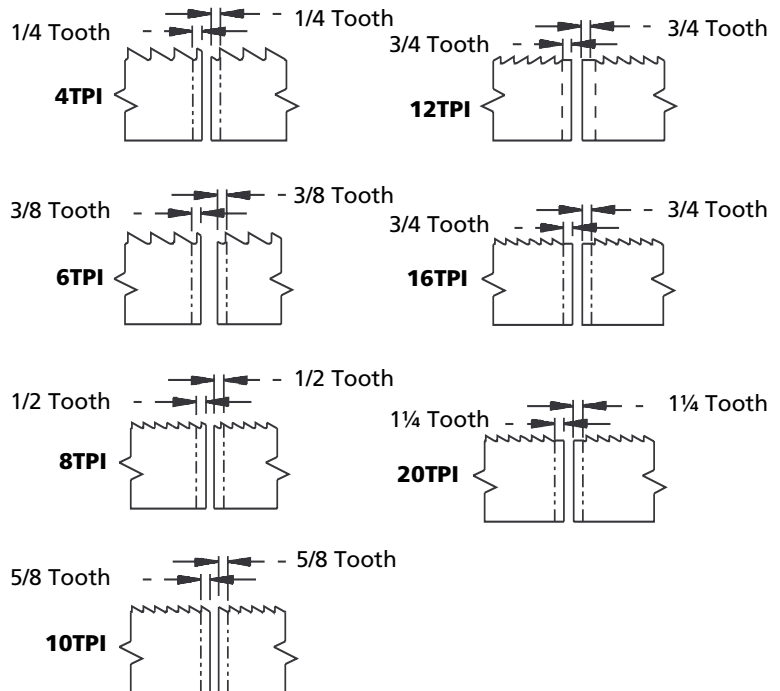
Tooth Spacing (TPI = Teeth per inch)
